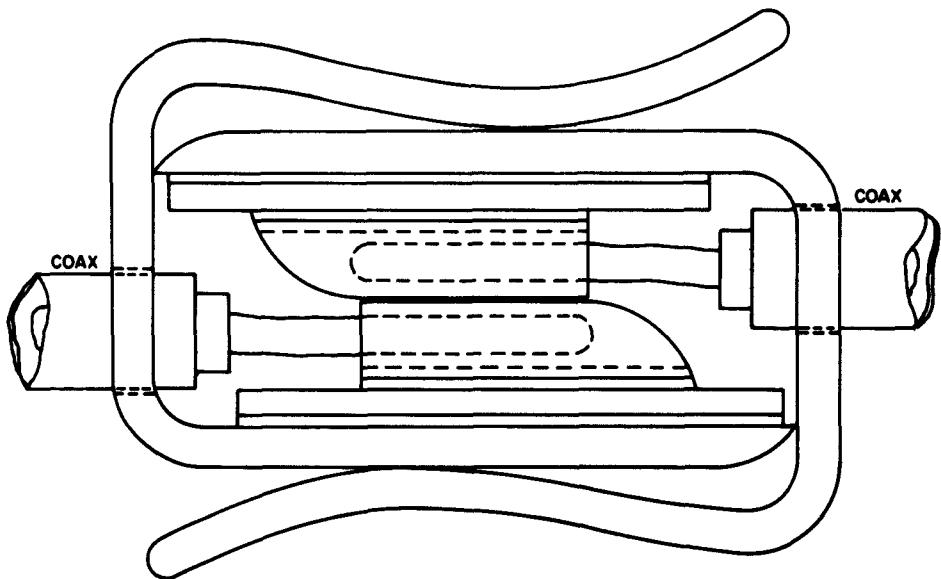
Details of Coaxial Cable Connector, Shown Mated (a)
